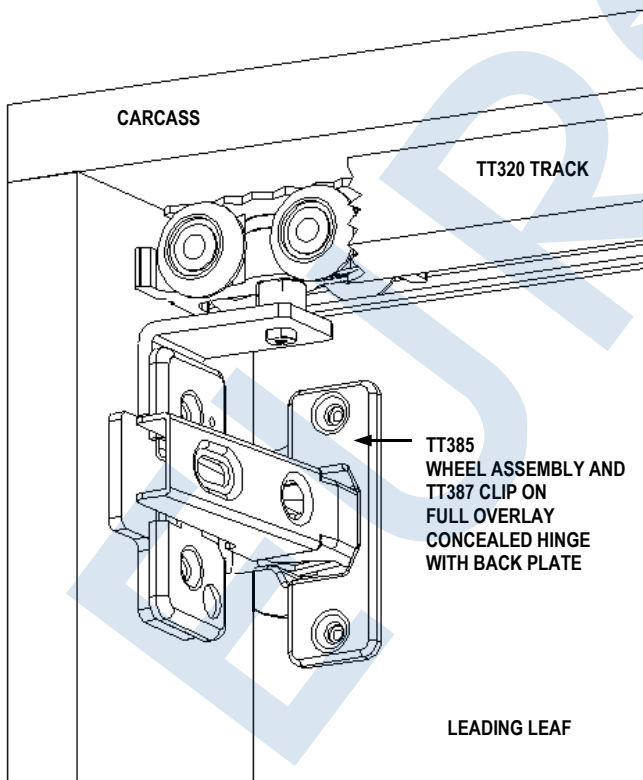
WHEEL ASSEMBLY WITH CONCEALED HINGE (Showing Track Cut Away)
